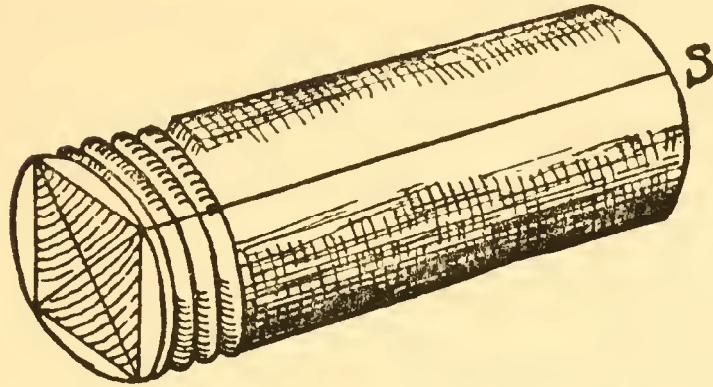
PREPARING WOOD FOR TURNED MOULDING.
